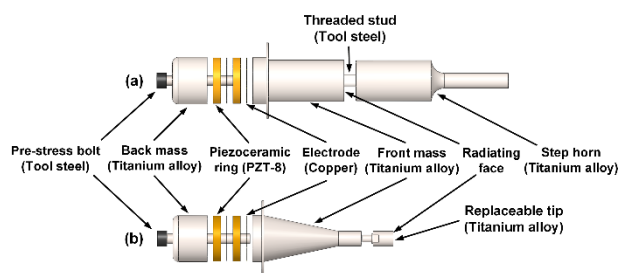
Exploded views of the ultrasonic transducers. (a) full wavelength, (b) half wavelength.
